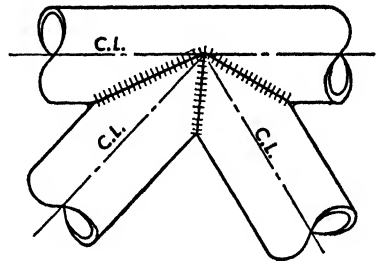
·8. Proper location of tubes in welded construction.
